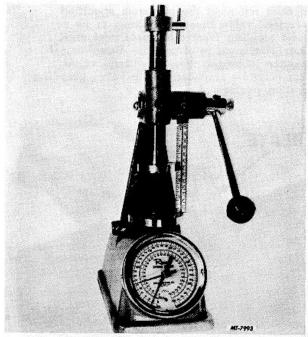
Checking Valve Spring Tension Inspect valve spring retainers and Rotocoil assemblies for wear. Rotate Roto-coil assemblies by hand to check for rough or irregular operation. Replace if wear or roughness is indicated.
